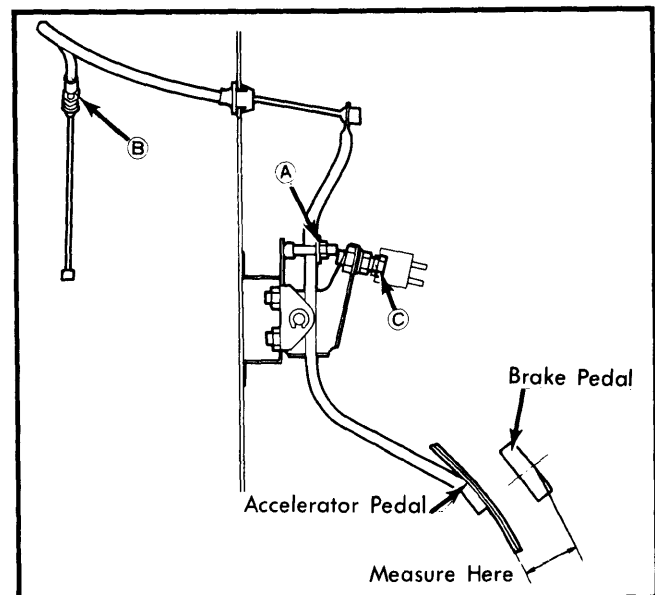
Adjusting Accelerator Cable And Pedal Height
